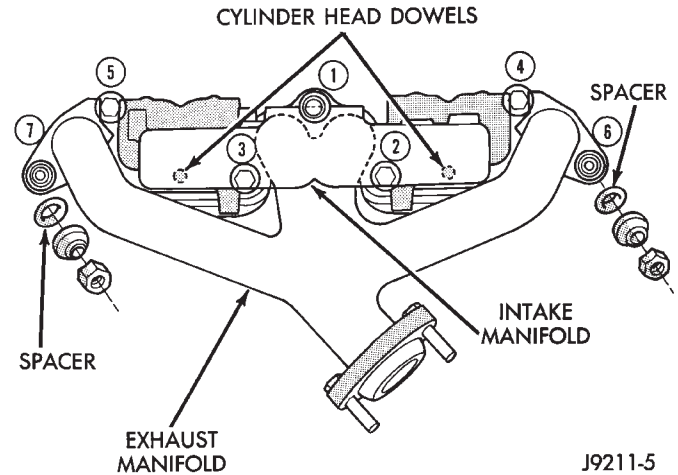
Intake/Exhaust Manifold Removal/Installation—2.5L Engine
